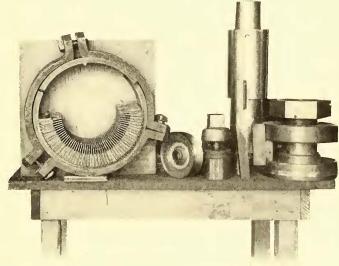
CLAMP AND COMMUTATOR SEGMENTS, ARBOR FOR TROLLEY WHEEL, TOOL FOR TURNING TROLLEY WHEEL, EXPANDING MANDREL AND COMMUTATOR CORE
